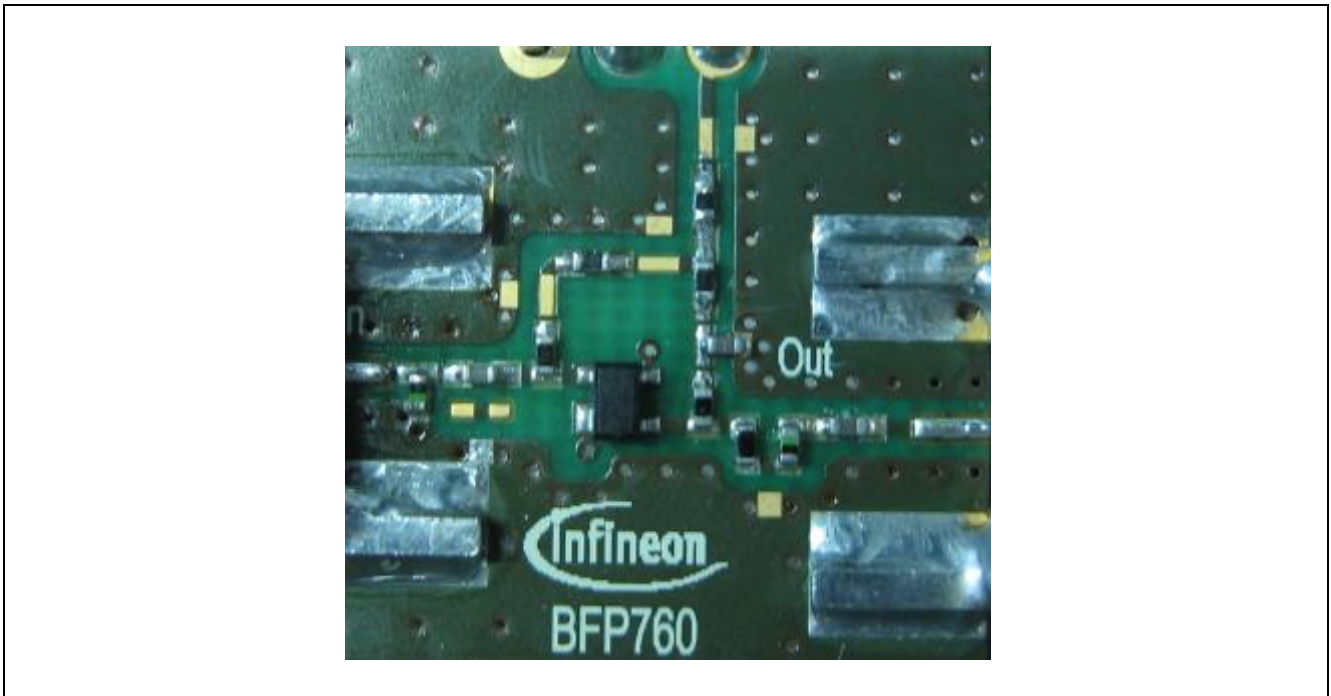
Photo Picture of Evaluation Board (overview) <PCB Marking Myymmdd Rev. x.x>
